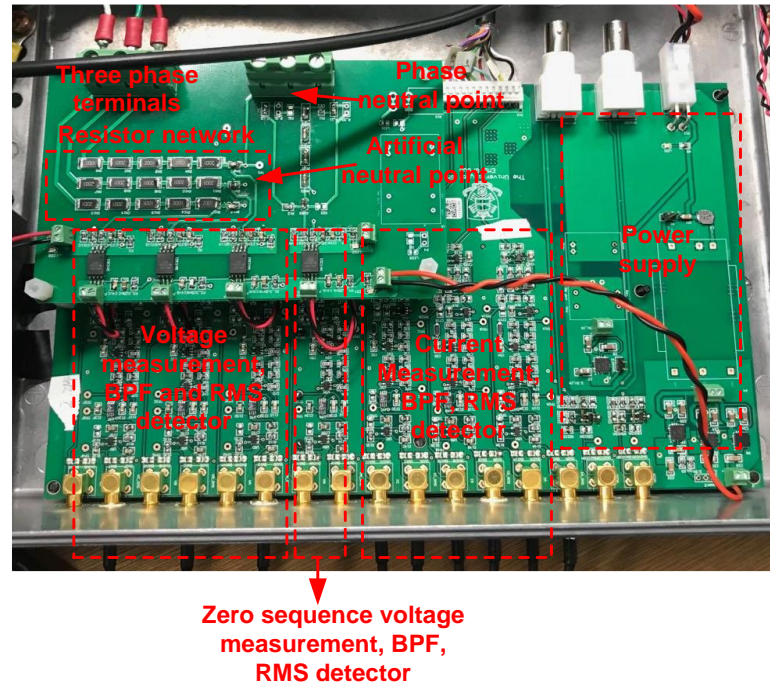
The assembled PCB board for the signal conditioning circuit
